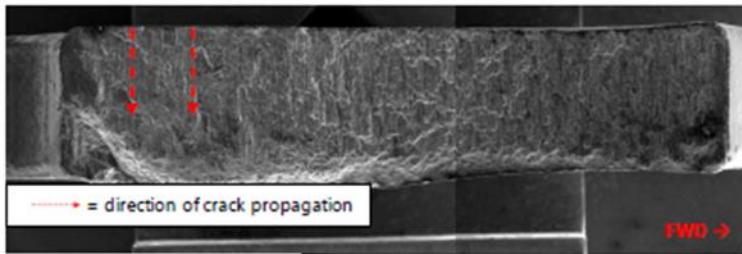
Overview of the LH side fracture surface (actuator side fragment, SEM-Image)
